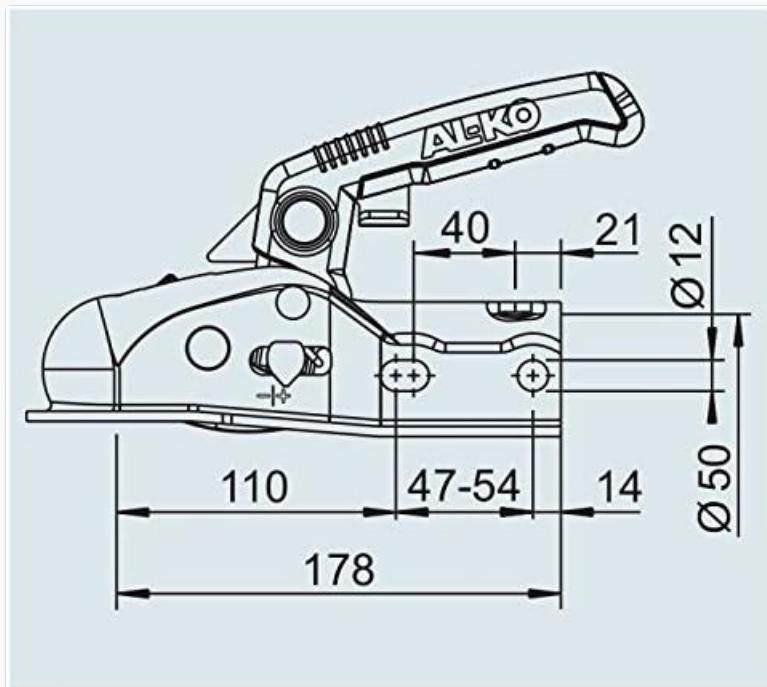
Dimensional drawing of the AL-KO AK 161-50 mm Ball Coupling, showing key measurements in millimeters for installation planning.
